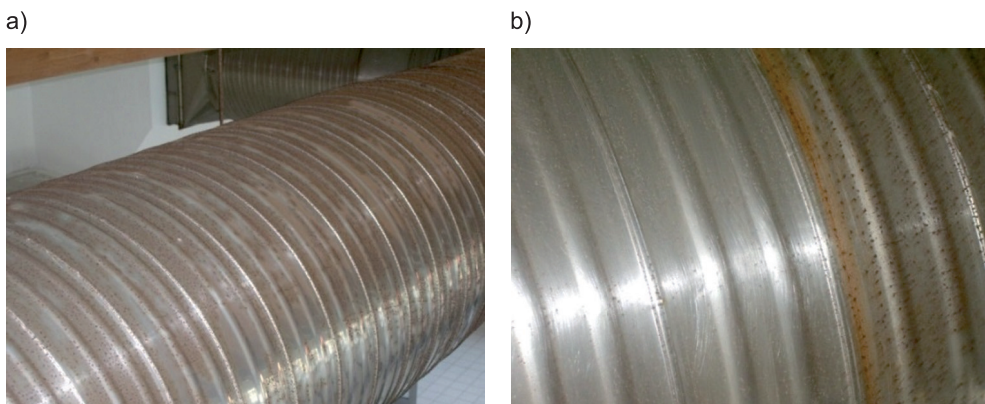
a) example of stress corrosion cracking due to cold rolling; b) example of crevice corrosion [18]
